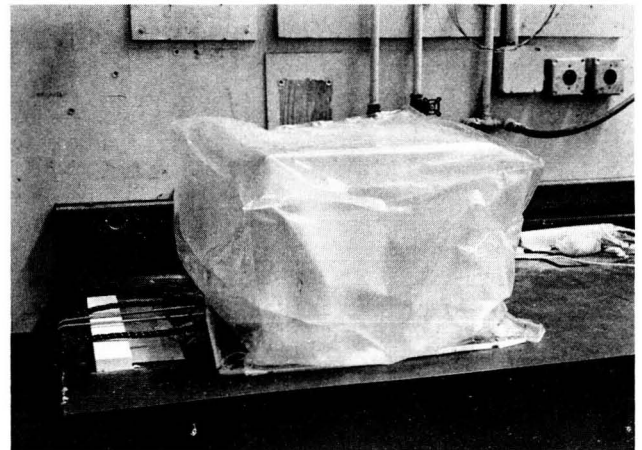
BRAZING FIXTURE IN PLASTIC BAG
